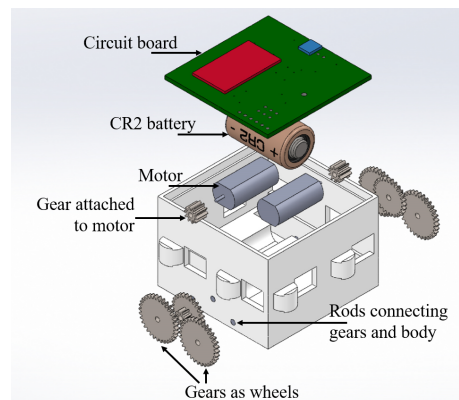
An exploded view of the PuzzleBot with mechanical and electrical parts.
